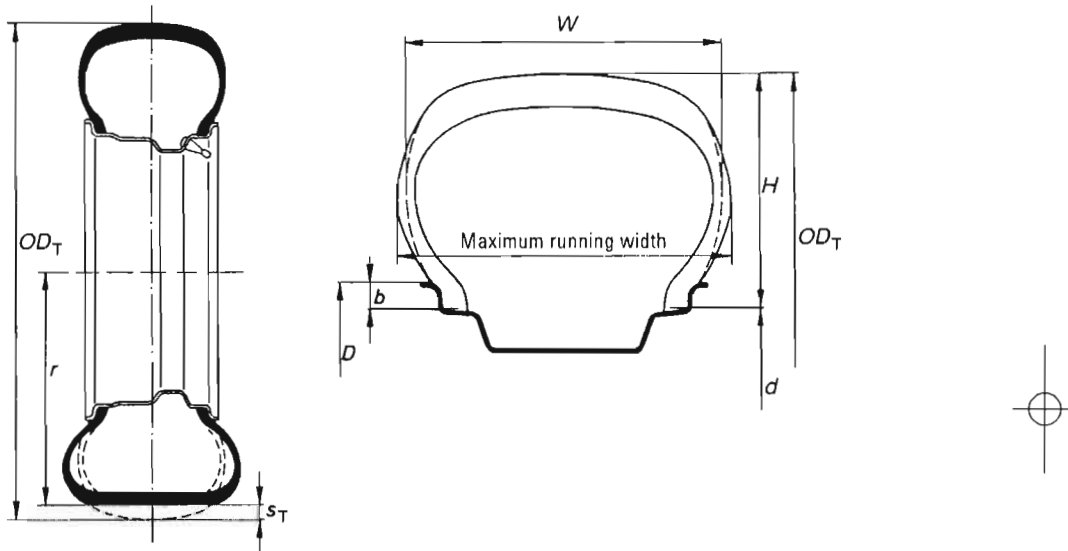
Tyre dimensions specified in standards and directives. B is the cross-section width of the new tyre; the tread moulding (as can be seen in Fig. 2.1) is not included in the dimension. For clearances, the maximum running width with the respective rim must be taken into consideration, as should the snow chain contour for driven axles. The tyre radius, dependent on the speed, is designated r (see Section 2.2.8). Pictured on the left is an asymmetrical well-base rim, which creates more space for the brake caliper and allows a larger brake disc (Fig. 2.10).
